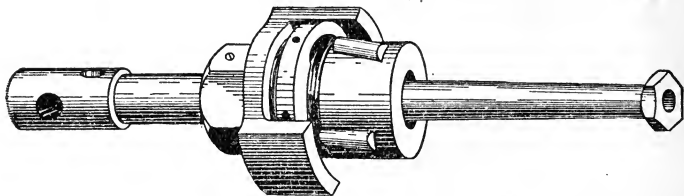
,976.—Roller tube expander. *It consists of a set of rolls placed in a cage and in contact with a central tapered pin. In operation the rolls are forced against the inside of the tube by driving in the turning and forcing in the taper pin. The rolls rotate with the pin and gradually expand the tube against the tube sheet.
